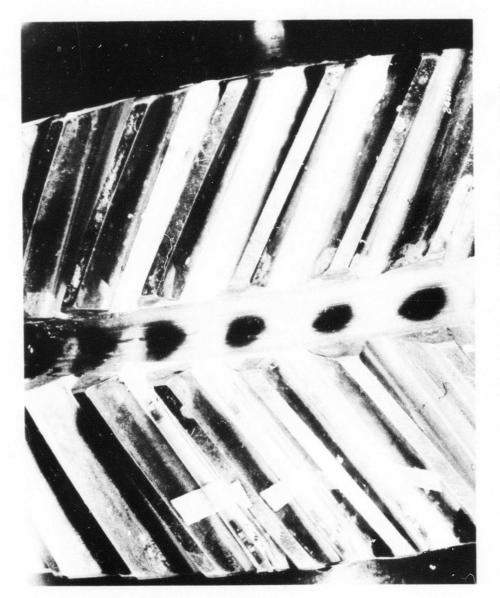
Strain Gages Located on Pinion Shaft Gear Tooth.
